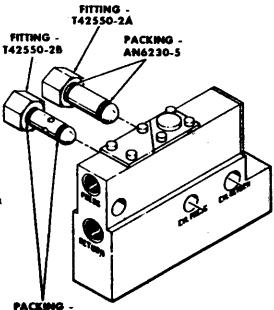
Installation of Test Fittings T42550-1B and T42550-2B
